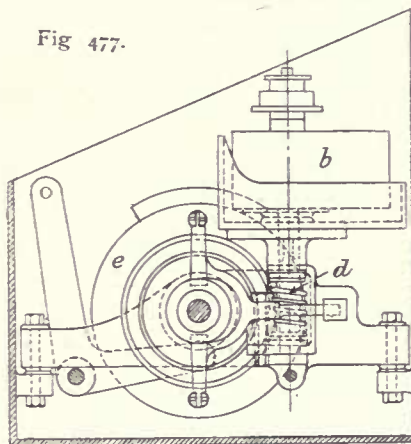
is a drawing of the connections between the motor and the switches. Fig. 476 is a view of the point motor without its case, and fig. 477 is a detail drawing of the motor in its case.
